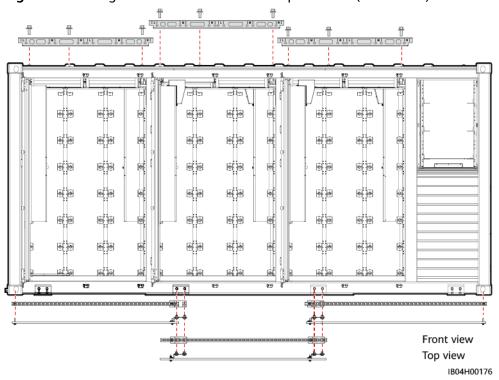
Long bottom beam installation position 2 (scenario 3)
